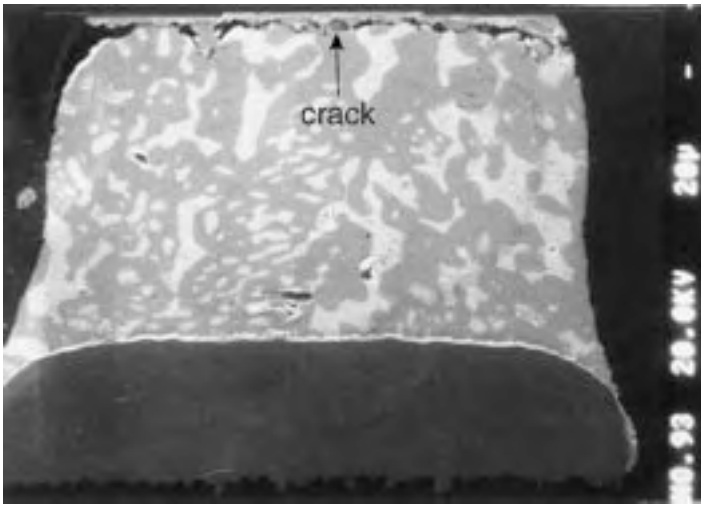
Complete cracking of a solder joint across the region of greatest coarsening of the solder.
